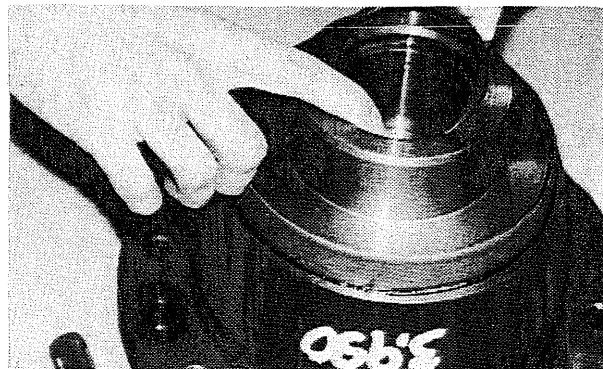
Drum Assembly & Installation (4 of 6)
